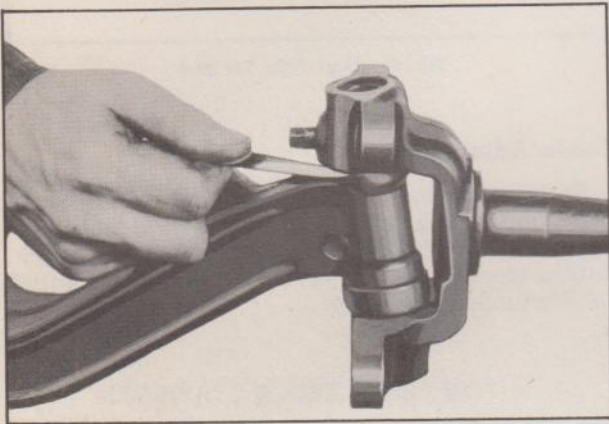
Clearance Between Steering Knuckle and "I" Beam
